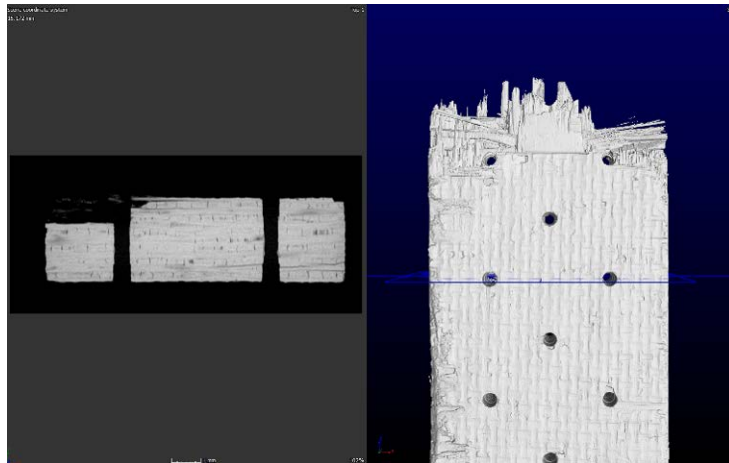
Step 4 – 2D (x-y plane) vs 3D location for specimen #3, tested in tension to failure at 1200°C in air
